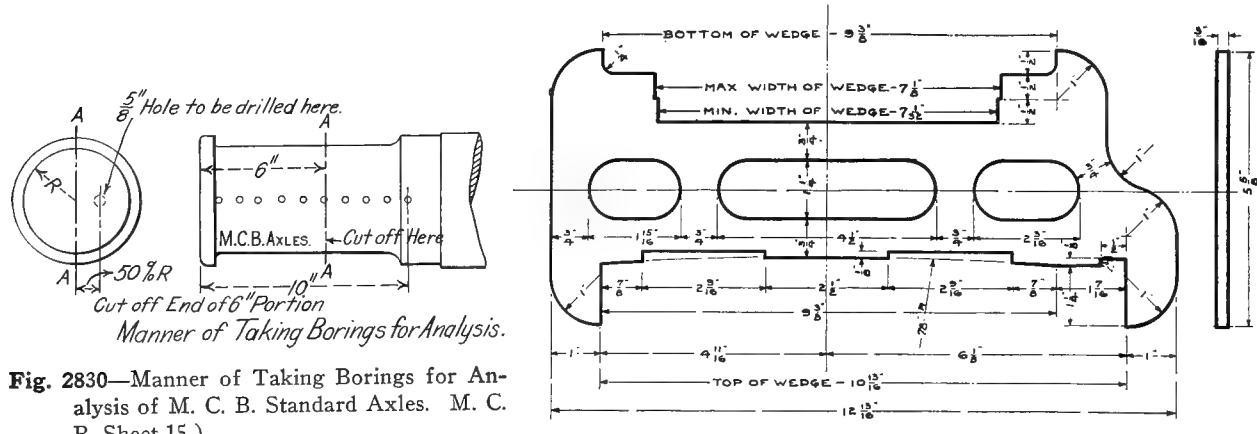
Manner of Taking Borings for Analysis of M. C. B. Standard Axles. M. C. B. Sheet 15.)
